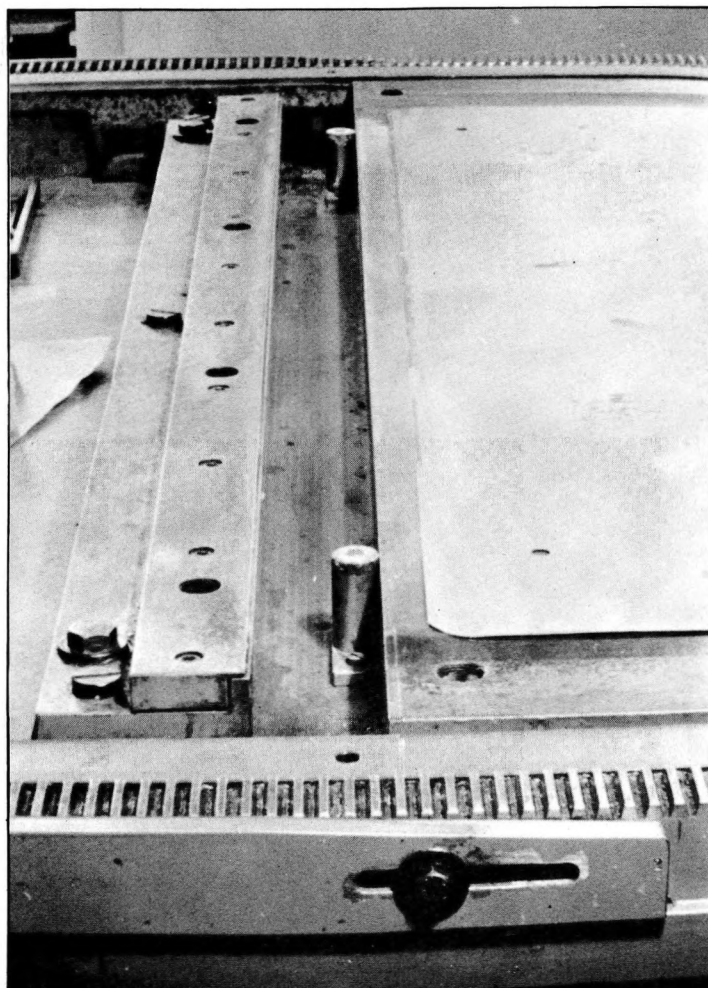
The two bolts close to the plate-fastening part in the flat bed offset press.
